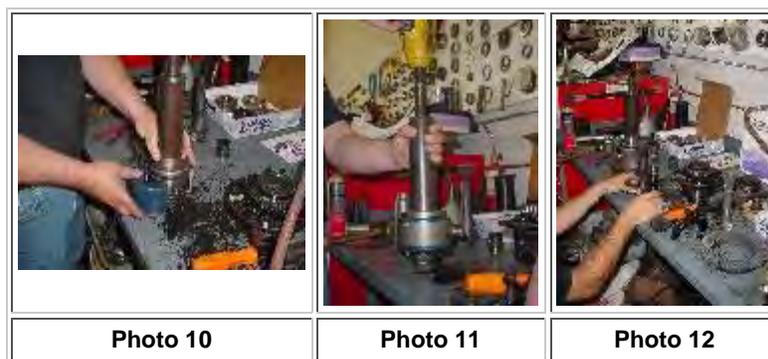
Bearing puller used to remove the pinion bearing from the pinion.
